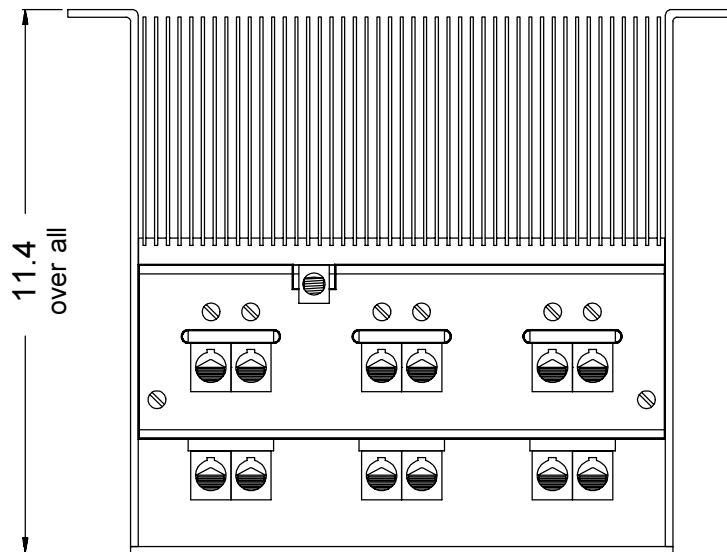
Mounting dimensions, 240 to 425 Amp frame
